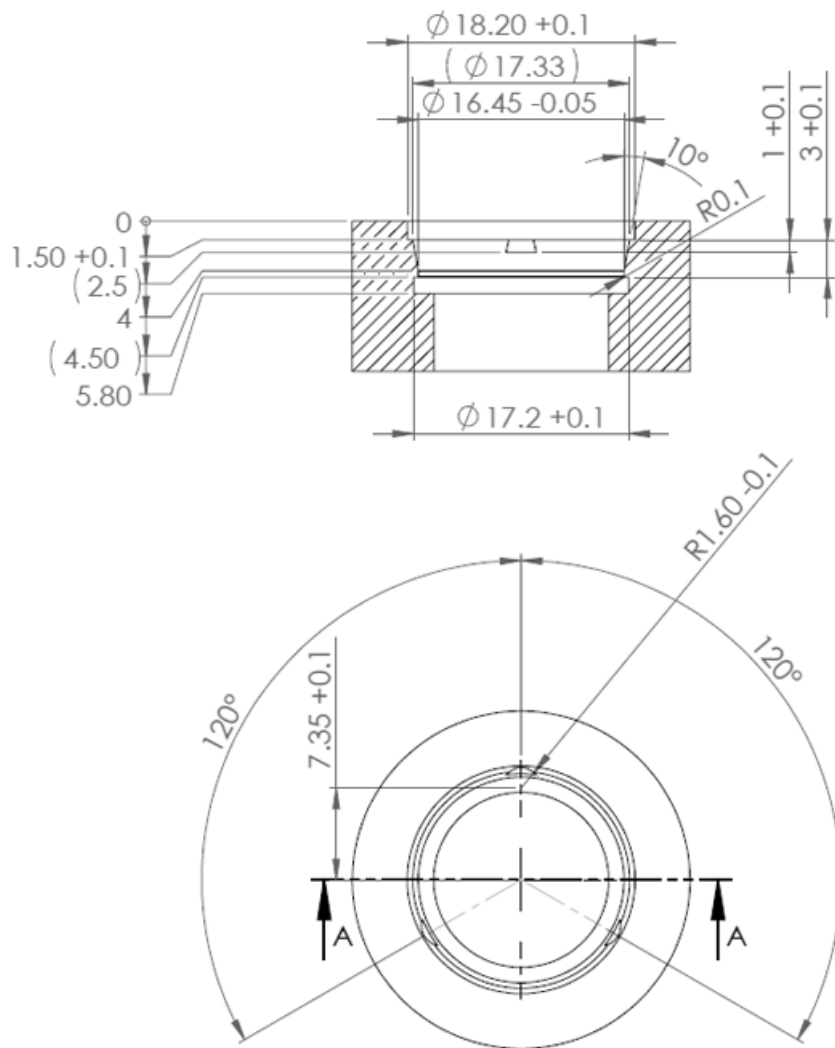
Dimension drawing: Workpiece drill hole for mounting the MDS D522 special version
